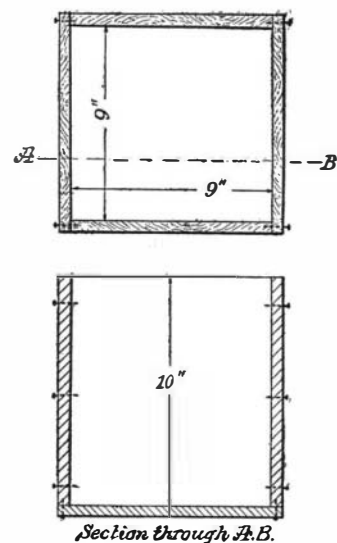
THE OUTSIDE FORM OF THE FLOWER POT MOLD.
